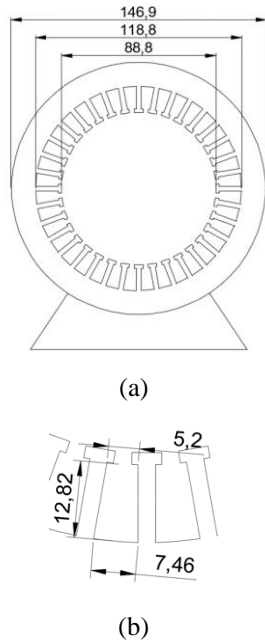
(a) Stator dimension (in mm) and (b) stator slot dimension (in mm).
